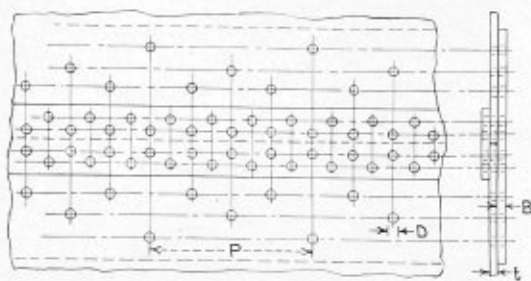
Quintuple-riveted butt joint with inside and outside welts
